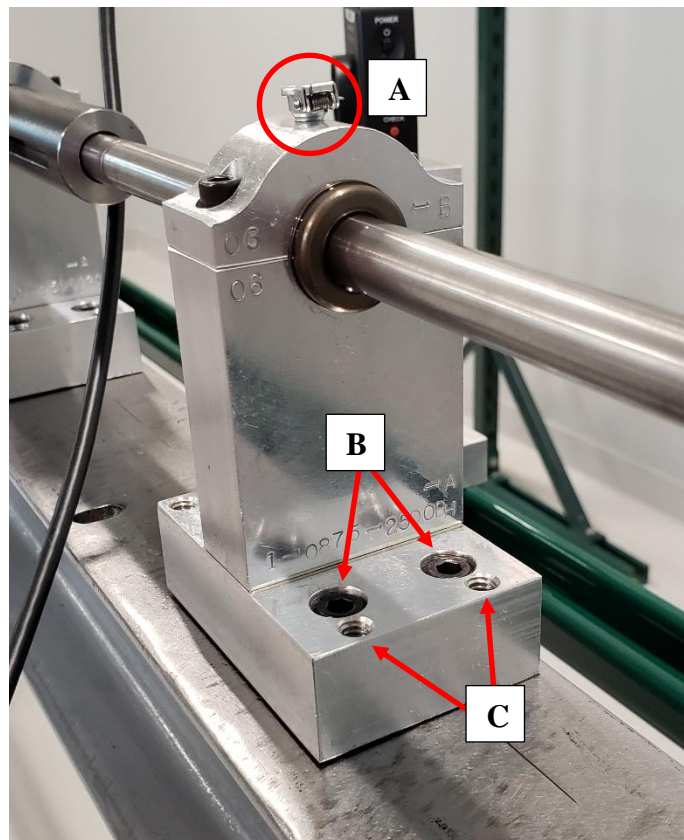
Ceramic lined linear bearing mounted in split pillow block bearing housing. The pillow block housing uses four set screws to adjust the alignment of the bearing. A. Oil port. B. Mounting screws. C. Adjustment set screws
